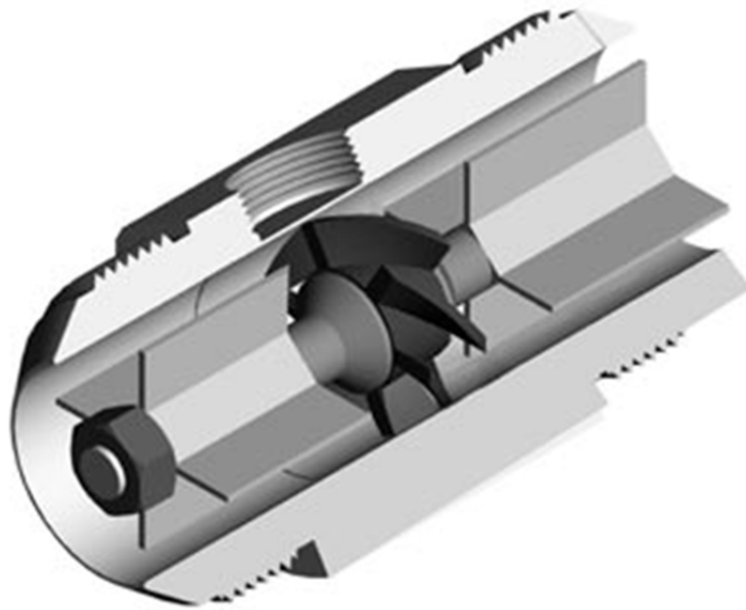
Cutaway of a Single Rotor Turbine Flowmeter [13]
